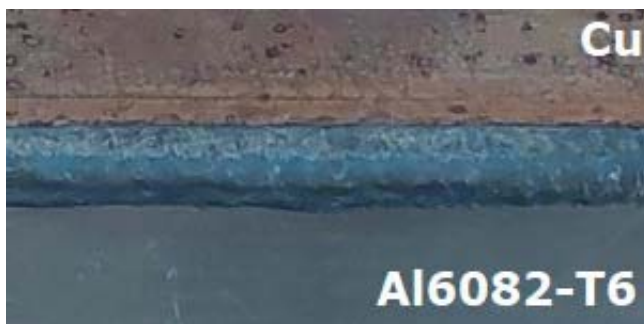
Welded seam of Cu and Al6082-T6 aluminum alloy
